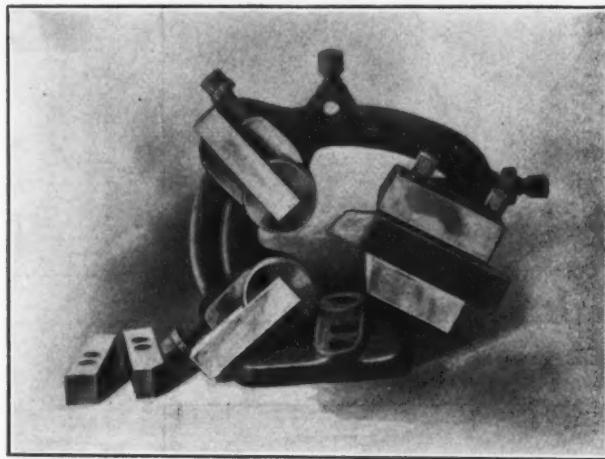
A Turning Tool as Used on the Gridley Automatic Turret Lathe.
